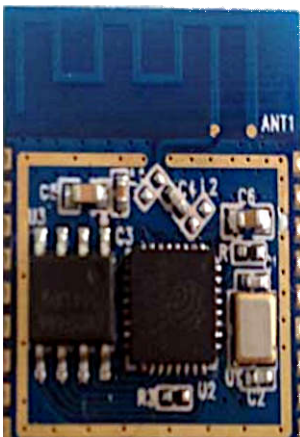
ATB1 Main PCB – Top side, screening cans removed
